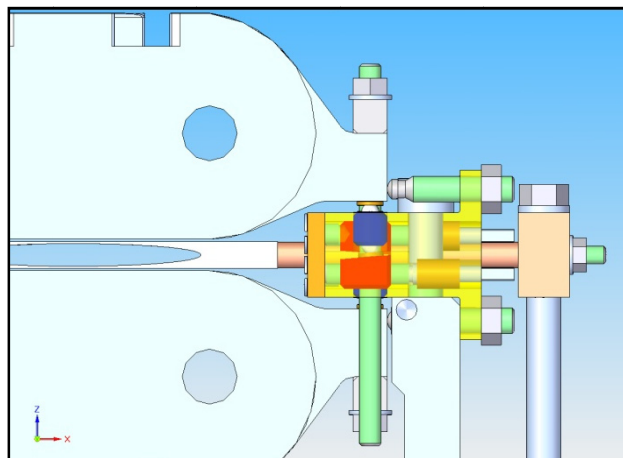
End view of magnet assembly showing optical-style adjustable mounting system.
